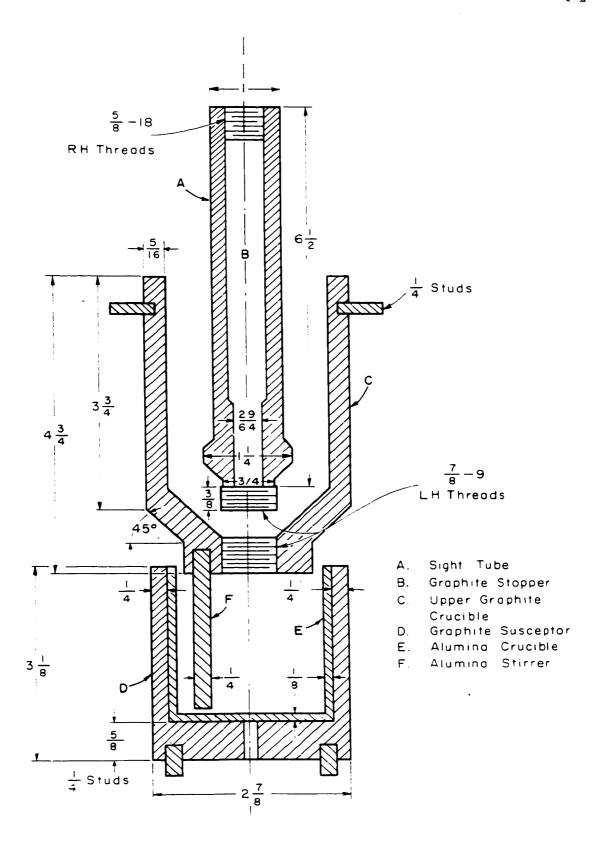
SKETCH OF CRUCIBLE ASSEMBLY
